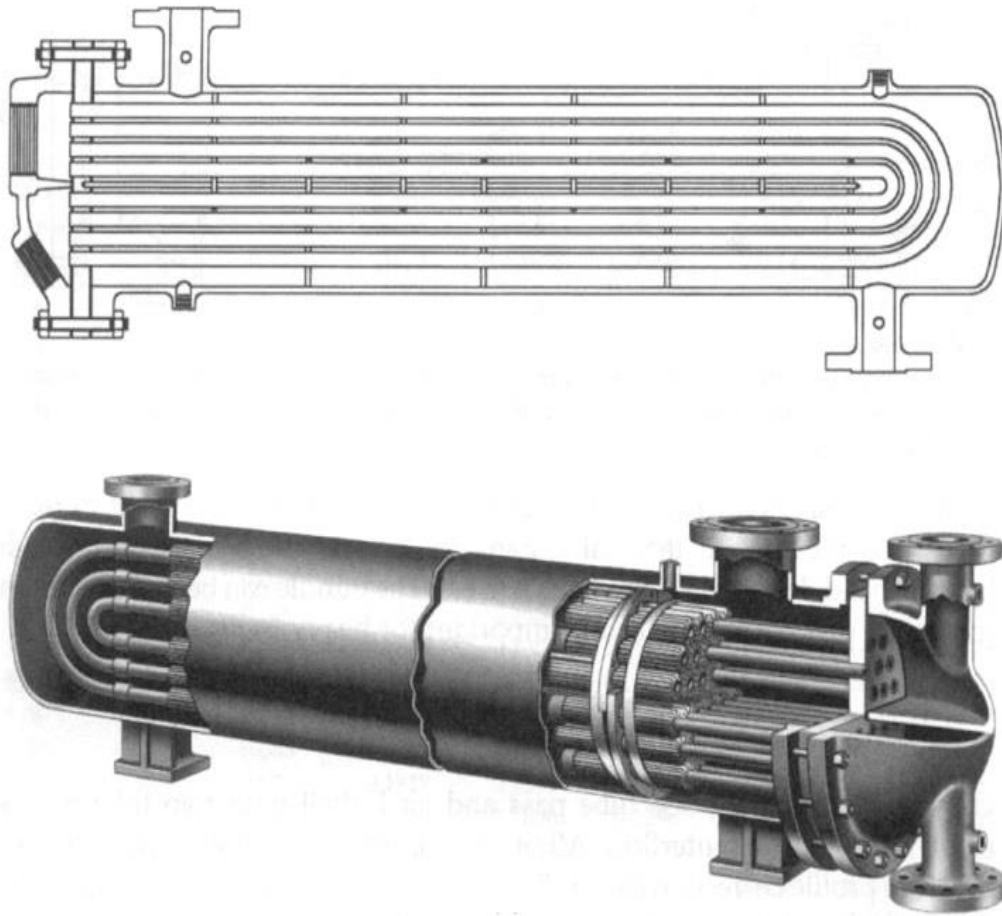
Schematic view of a single shell pass and two tube pass U-tube Shell and Tube heat exchanger
